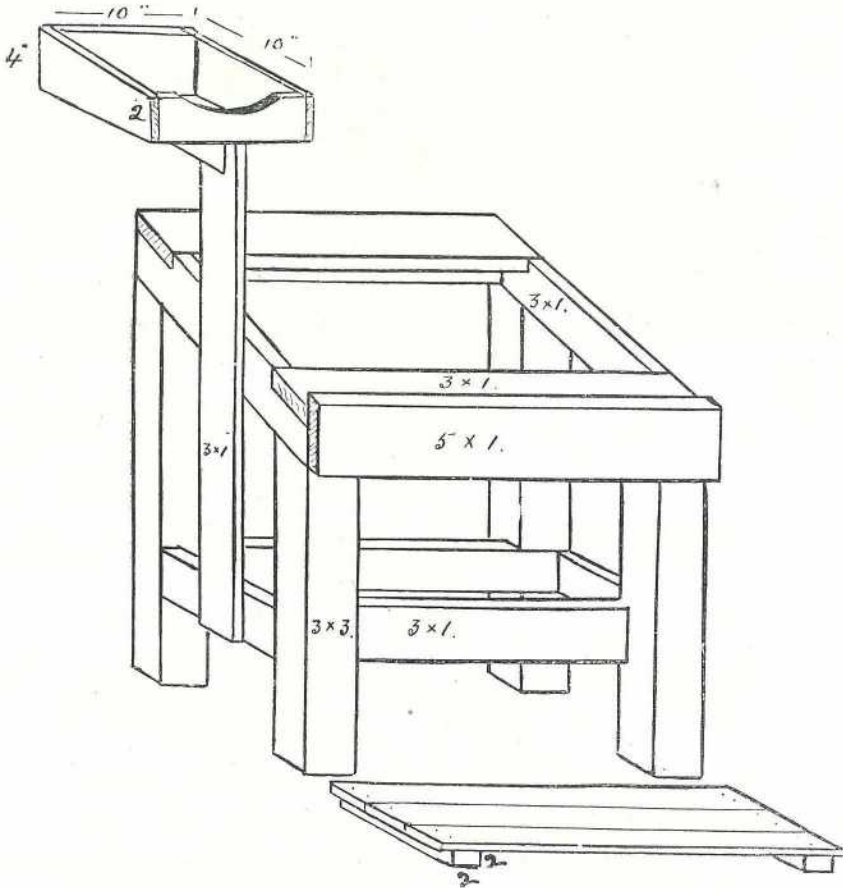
(Fig. 3).—PACKING STAND WITH PAPER HOLDER AND SPRING BOARD.
